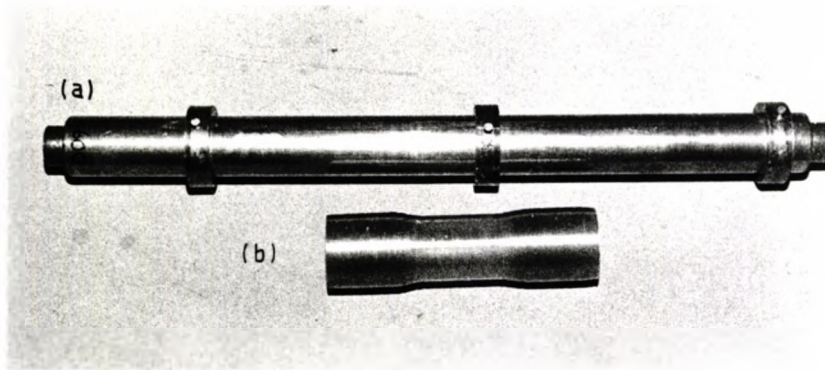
(a) Metallic Stops and Mandrel Assembly.
